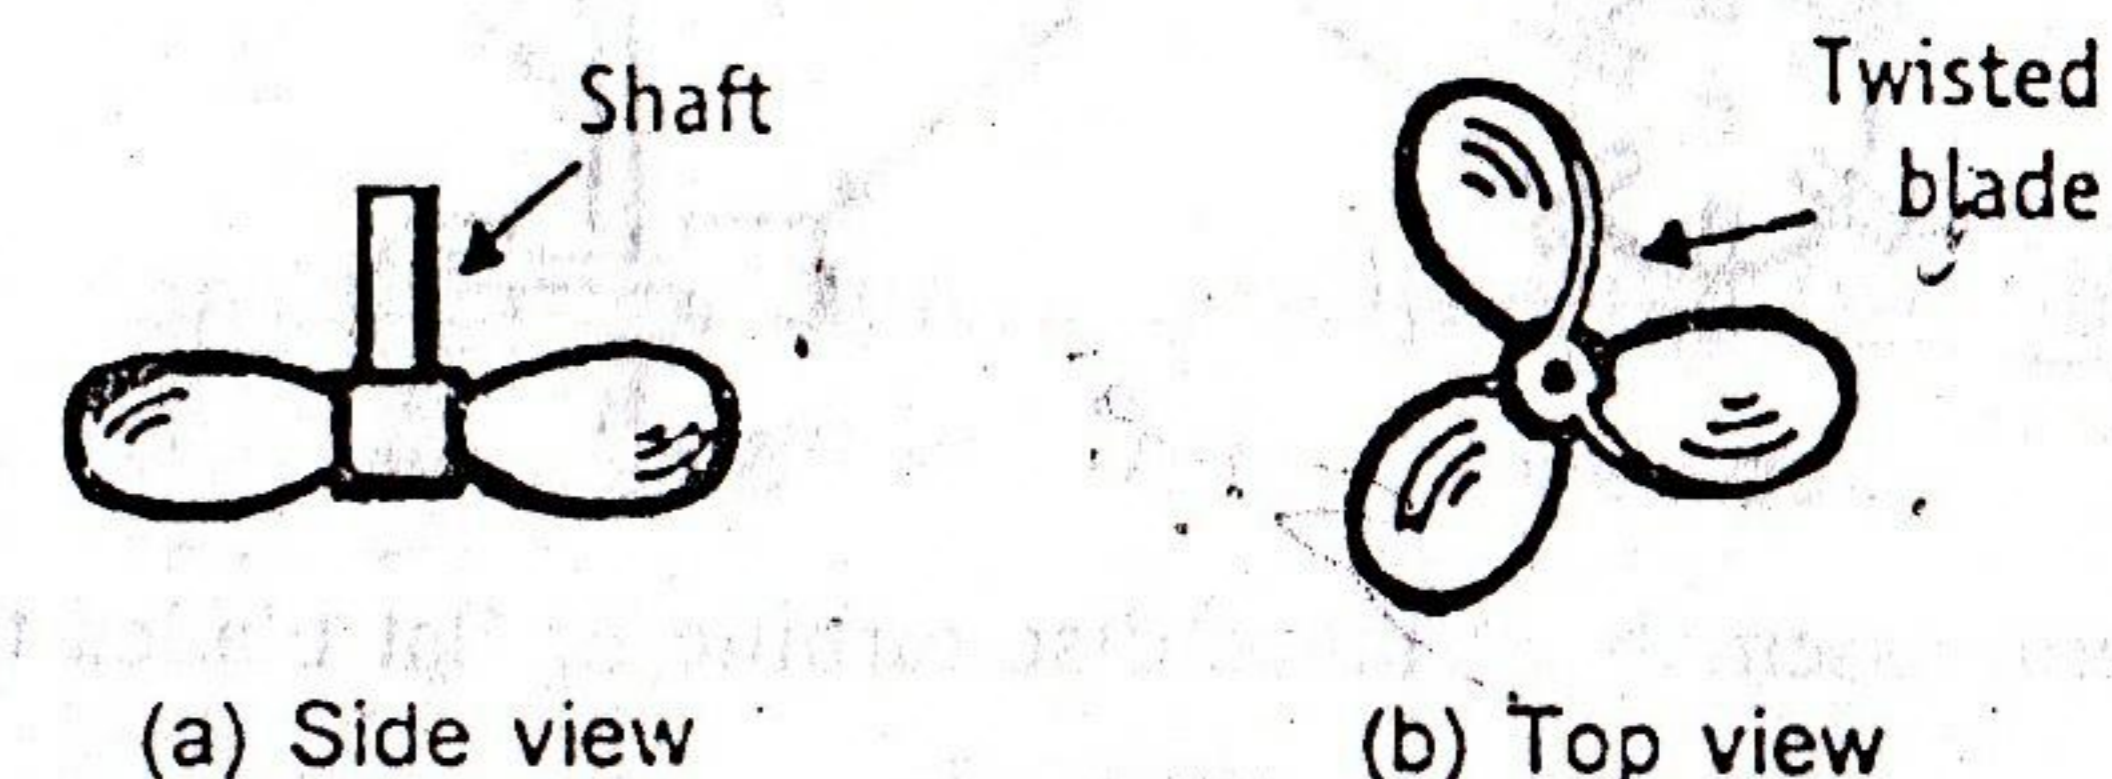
Propeller type of mixing devices. A three bladed design.
